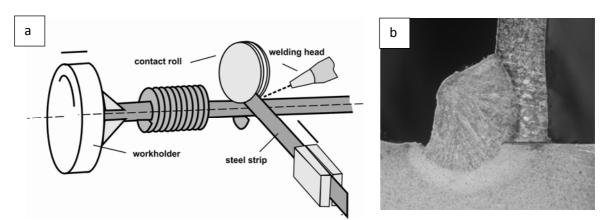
Welding finned tubes fillet weld: a) diagram of the process welding, b) the joint weld pipe - rib area (magnification 5x)
